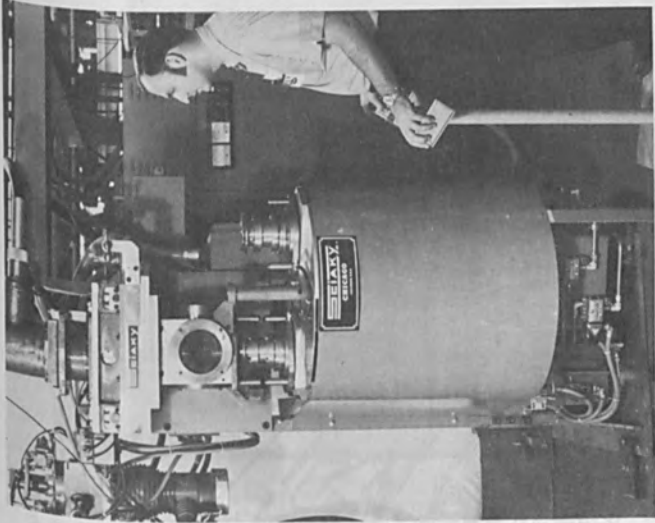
Small Chamber, Bottom Delivery, Dial-Feed, EBW, Welding in DOWNHAND Position.
